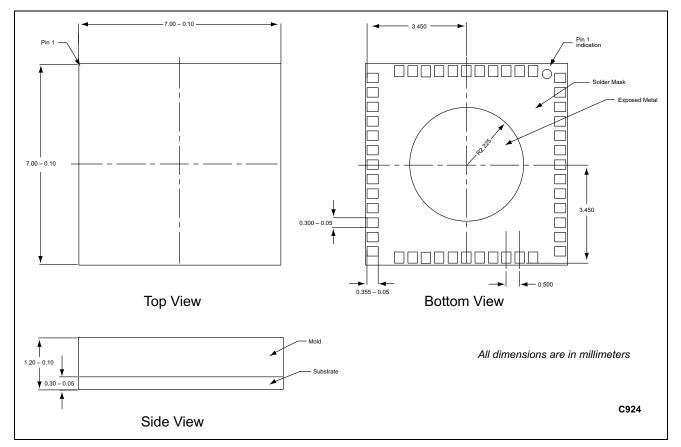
CX74037 Package Dimensions for a 48-Pin, 7x7 LGA Package
